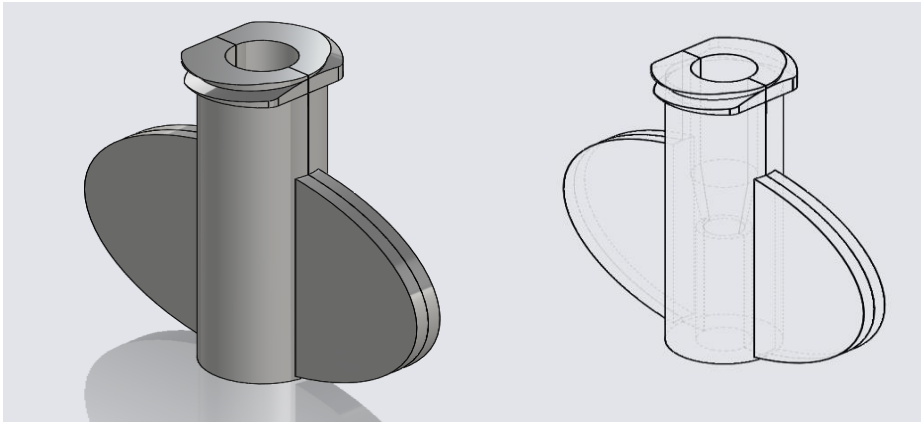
CAD modeled Luer Lock fitting in a solid body and wire frame view.
